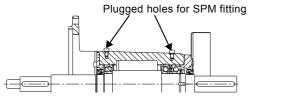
Bearing bracket for retrofitting of SPM measuring equipment
